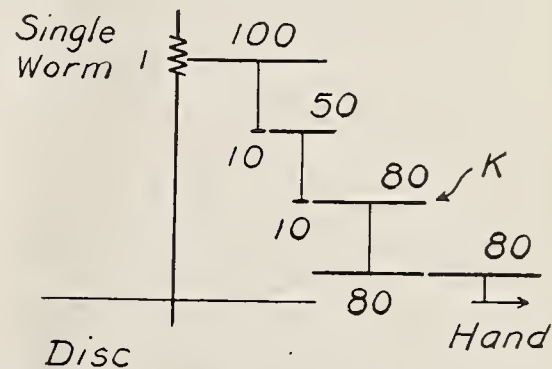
DIAL GEARING WITH WORM ON ARMATURE SHAFT
